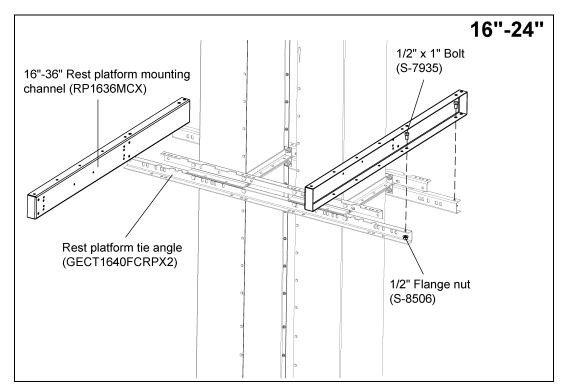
I Bolt hole locations for 16"-24" rest platform mounting channels to tie angles.
